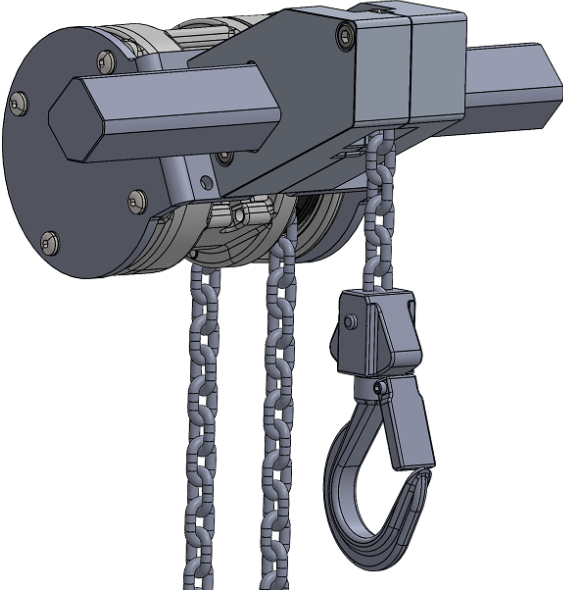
Kit with hoisting unit, holder, suspension bolt and fixing plate
